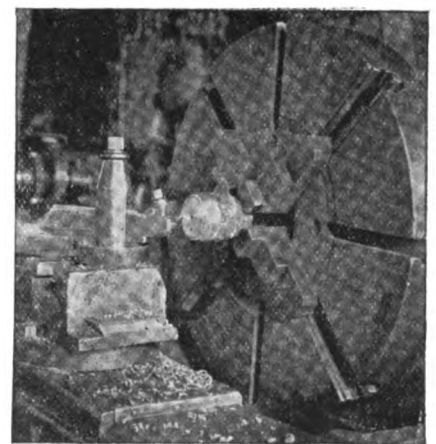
K. BUILDING UP OPERATIONS. (Note that the weld is easily machined).  $\frac{5}{32}$ " Electrode, 130 Amp., 20 Volts will deposit one pound of metal in approximately 30 minutes.  $\frac{3}{16}$ " Electrode, 175 Amp., 22 Volts will deposit one pound of metal in approximately 20 minutes. Using  $\frac{5}{32}$ " Electrode, one cubic inch of steel may be deposited in about  $7\frac{1}{2}$  minutes. The metal when deposited on mild steel by the metal electrode process will always be soft and easily machined. The carbon electrode process should be used for building up operations only when the built up piece can be later annealed to take out contraction strain.
